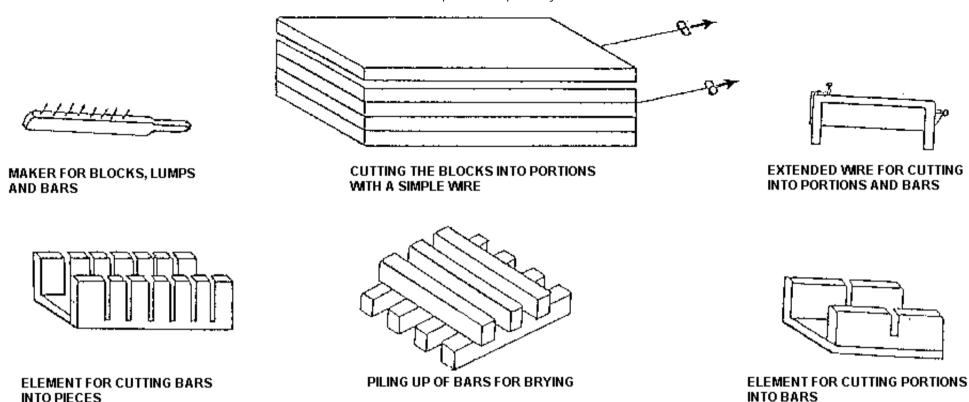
MATERIALS AND SIMPLE TECHNIQUES USED TO CUT AND DRY SOAP
